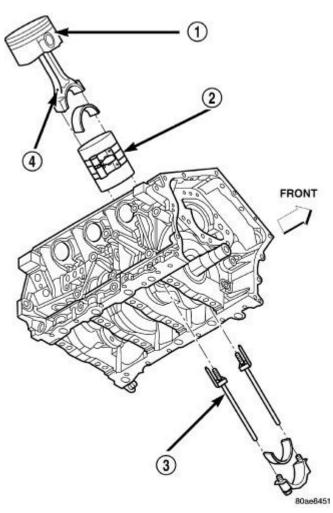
Piston & Connecting Rod Courtesy of CHRYSLER LLC
